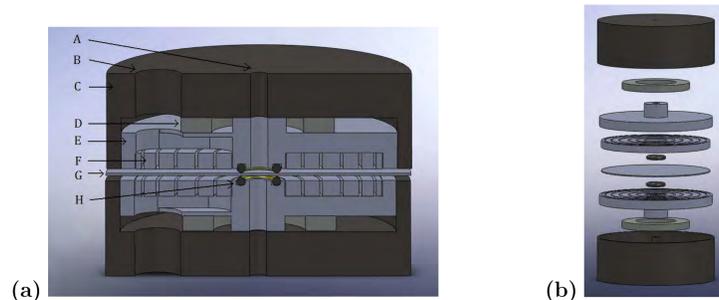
Solidworks model of proposed valve, (a) Cross sectional view (A=Gas inlet, B=BNC inlet, C=Upper iron casing, D=Permanent cylindrical magnet, E=Aluminum solenoid plate, F=5-turn pancake solenoid, G=Aluminum/Steel moving disk, H=Buna-N O-ring) and (b) disassembled view.
